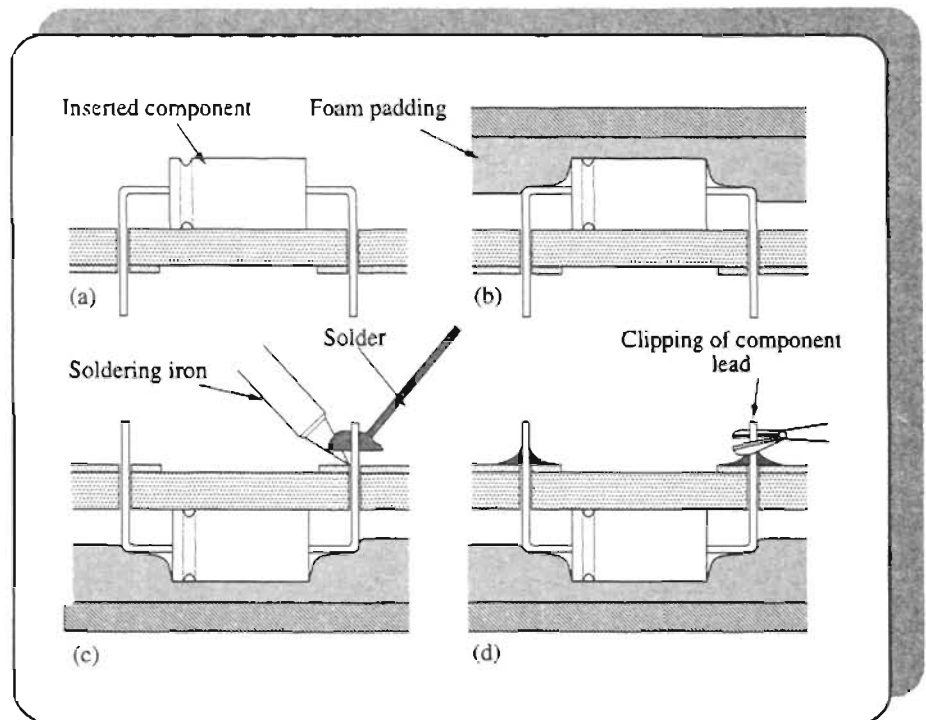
Typical hand soldering process (a) a leaded component is inserted (b) the component is clamped in place (c) the component's leads are soldered (d) excess leads are trimmed
